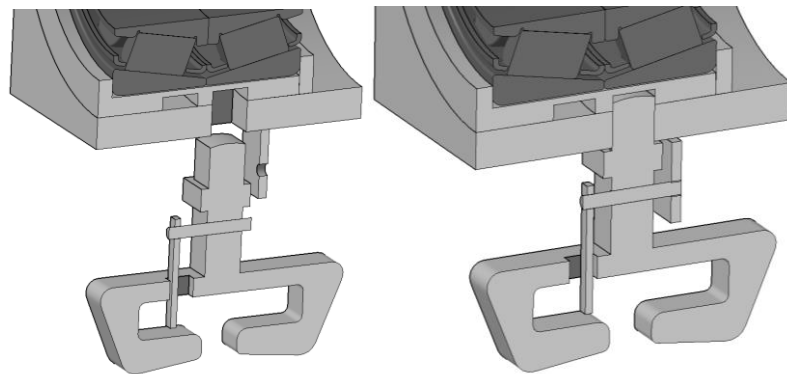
Transverse movement of inner axle box and locking the mechanism
